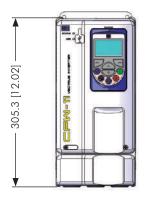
Inverter dimensions - frame size D - mm [in]
